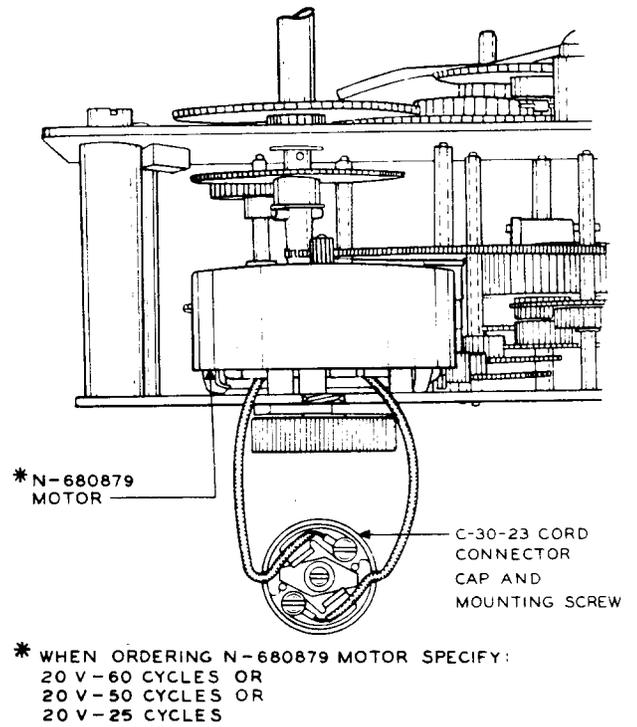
Motor Mechanism - Model 30 Calculagraph (Motor With Aluminum Cap Rotor)
